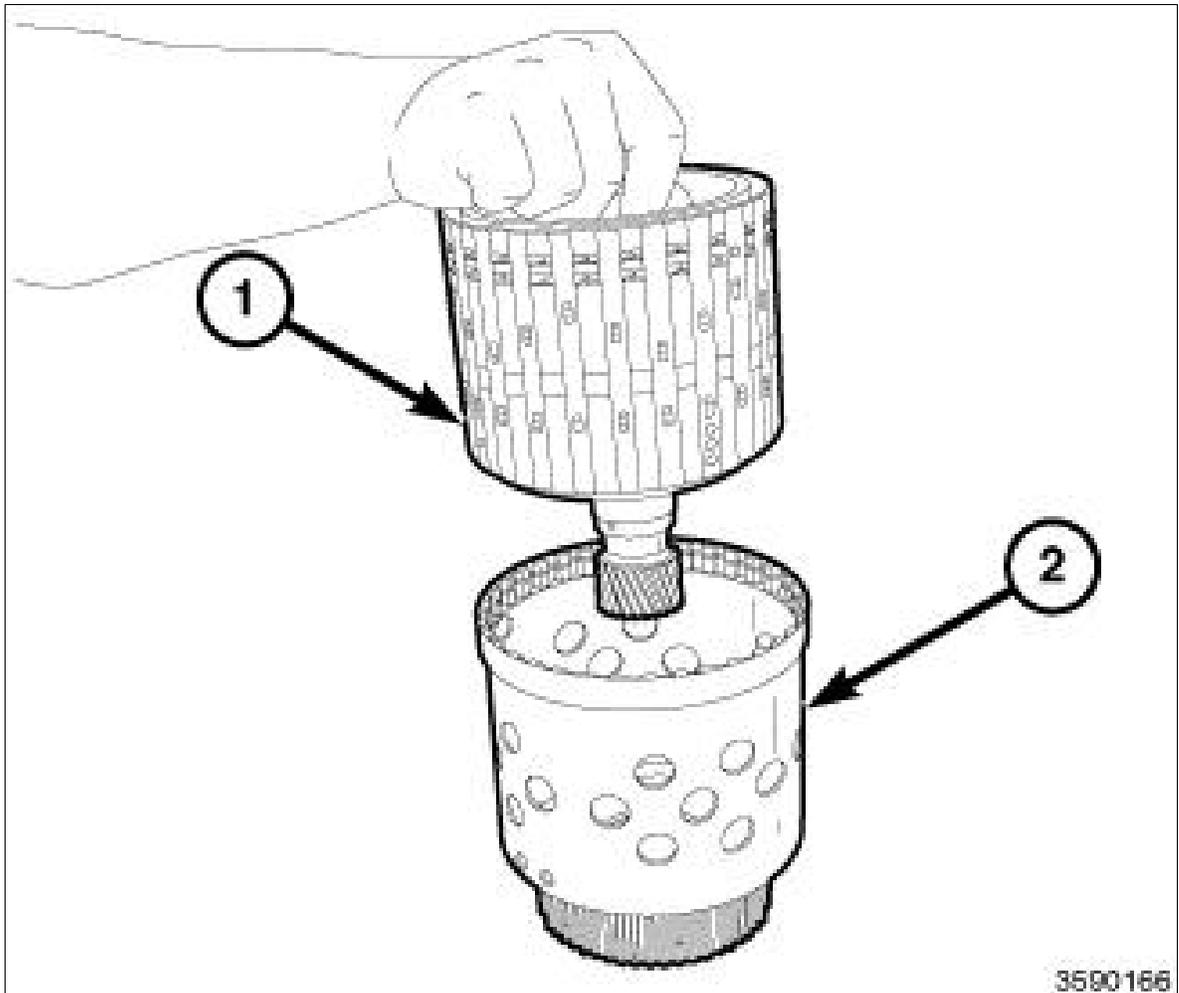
Snap Ring & P4 Sun Gear/C/E Clutch Retainer
